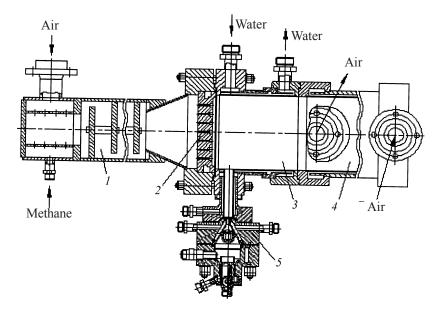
High-temperature reactor with a labyrinth mixer. (1) Mixer, (2) jet grid, (3) combustion chamber, (4) cylindrical spacer ring (reactor chamber), and (5) igniting device.
